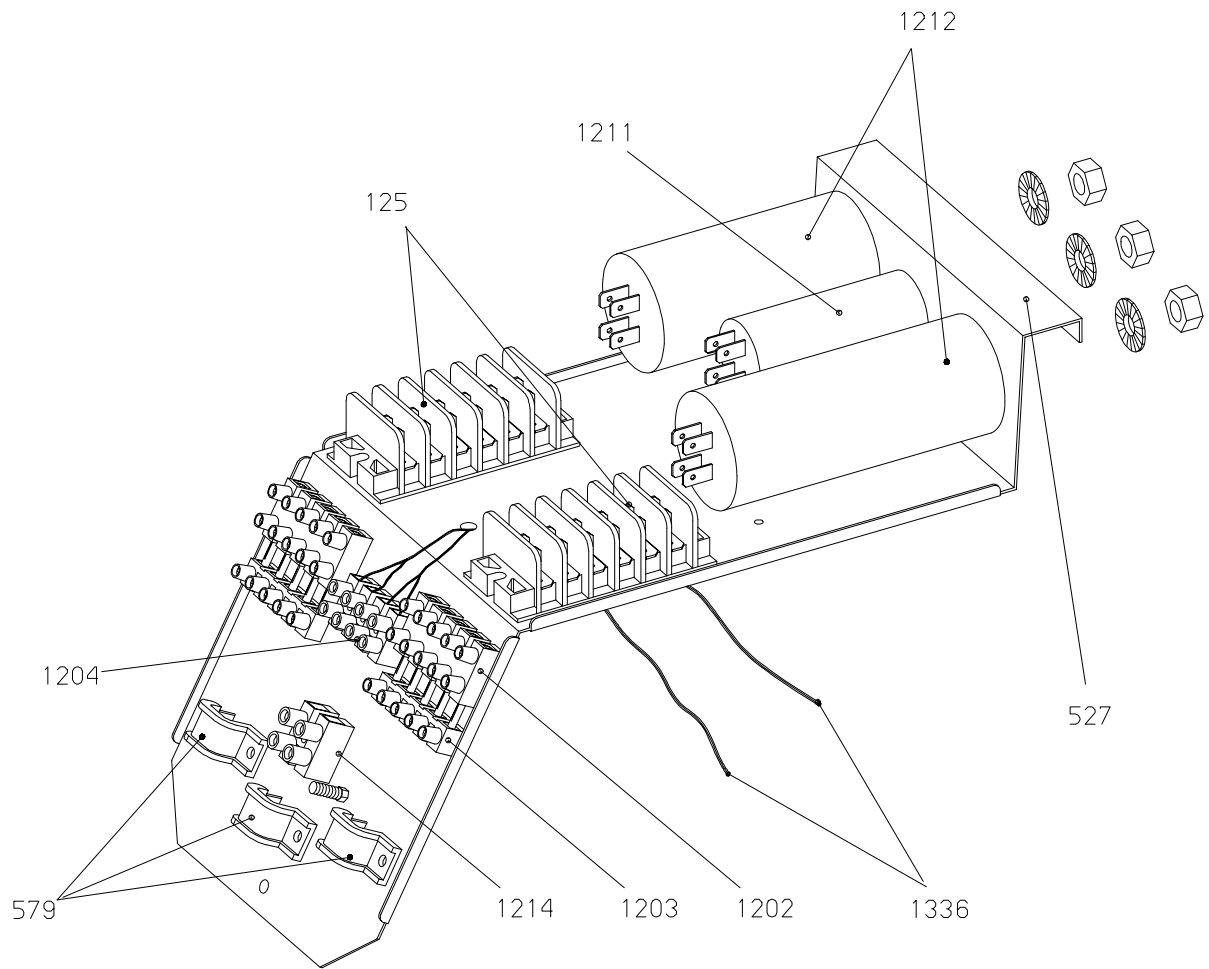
ELECTRICAL ASSEMBLY- CUE-1515,2020,2030,3030,4040
